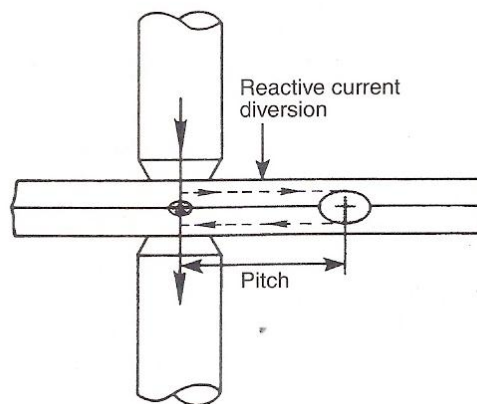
Minimum welding distances from the centre of the weld to the centre of the next weld
